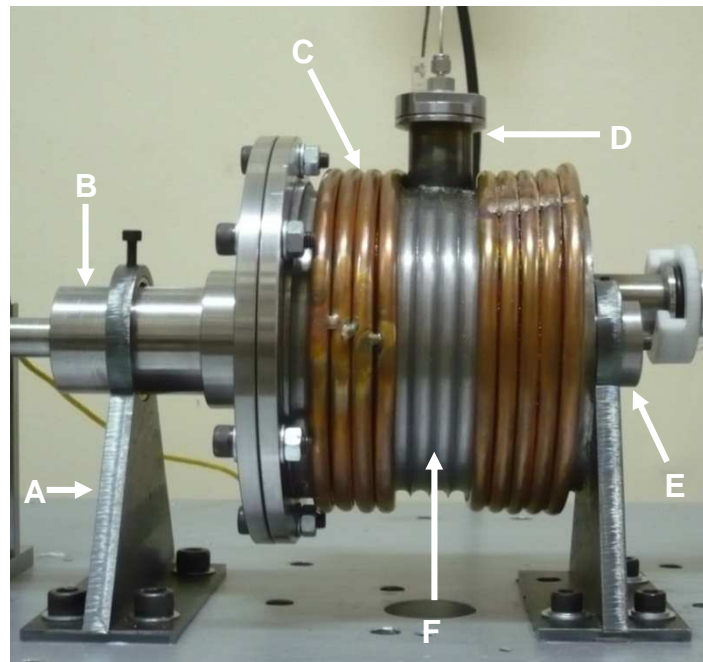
Front view of mill chamber assembly. A – hub support stand, B – hub flange, C – copper cooling coil, D – feed inlet/outlet neck-flange, E – support shoulder and F – mill chamber with helical groove.
